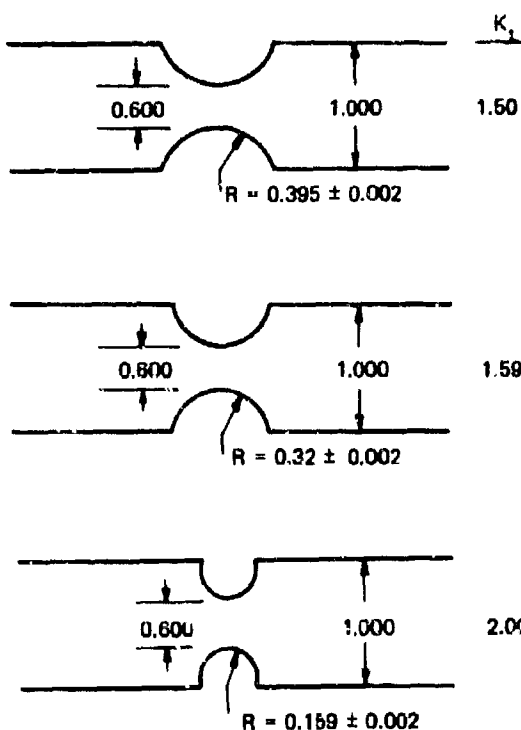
Notch configurations and notch dimensions of 0.1-inch thick flat notched specimens.
